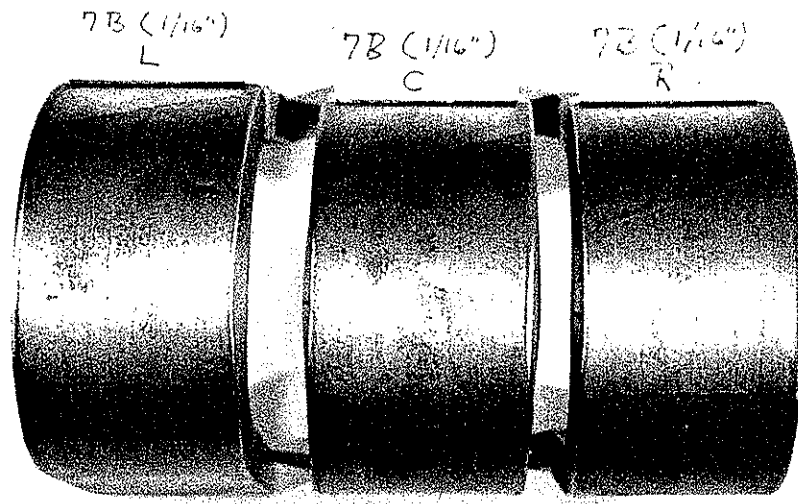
Side Bend Test Specimens from flange Splice 7B[photo: 5/91/11-4]
